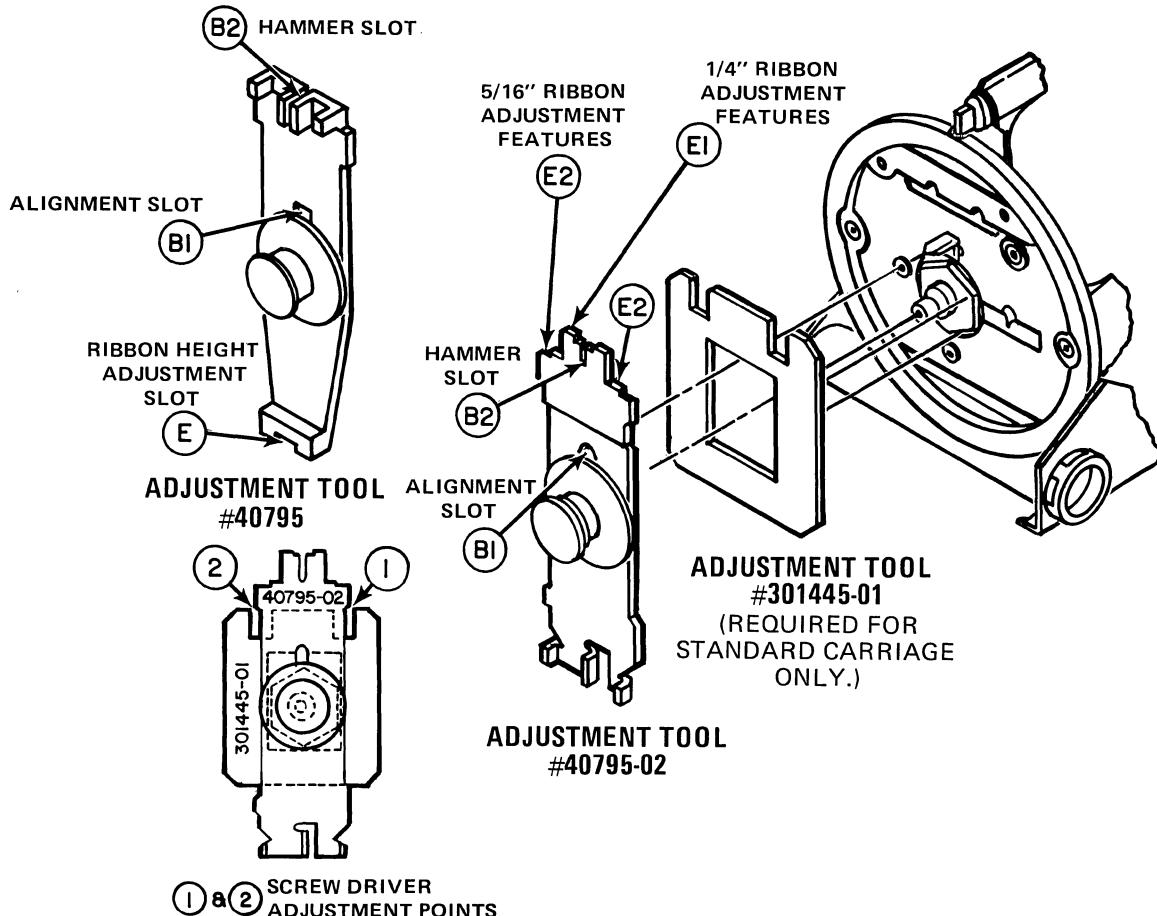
ADJUSTMENT TOOLS 40795, 40795-02 and 301445-01
